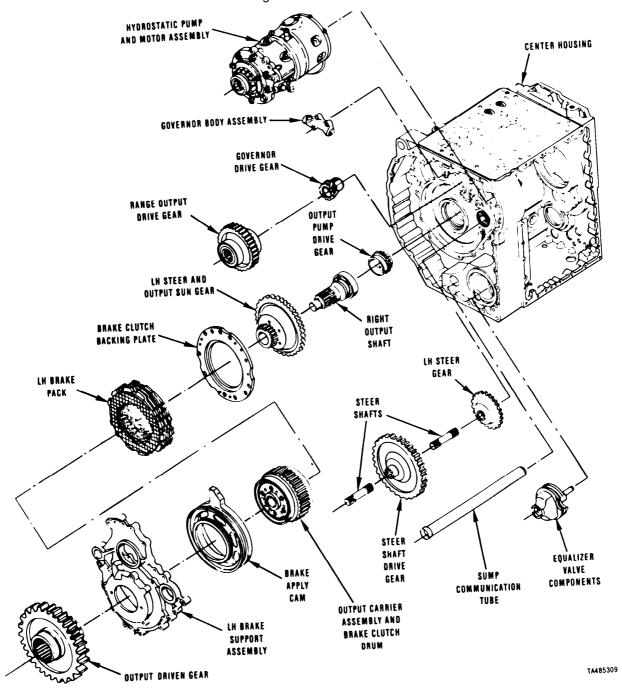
Exploded View of Major Components--Right Side of Center Housing Assembly
